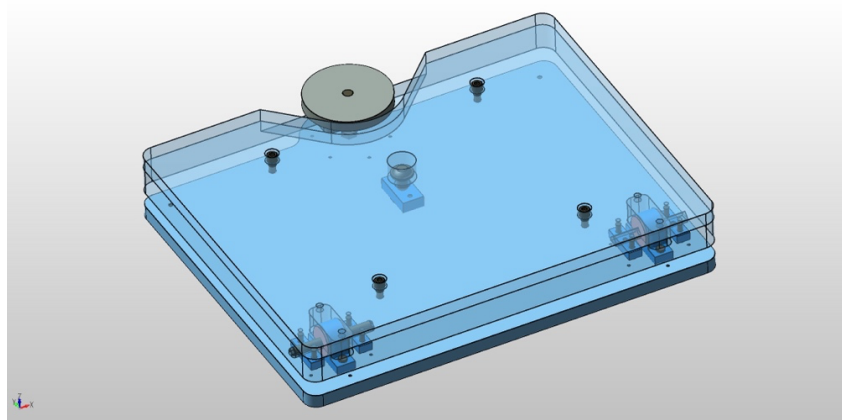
Large Tip Tilt Mount, CAD Model, Isometric View
